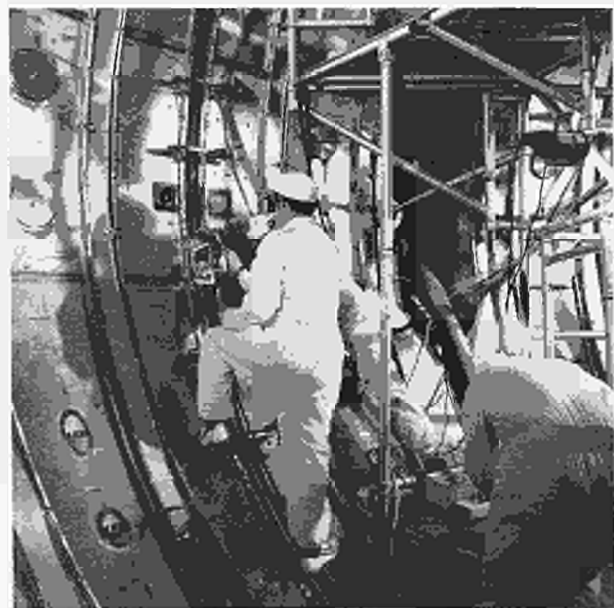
Welding of the Torus U-joints, the vacuum seals between octants.
